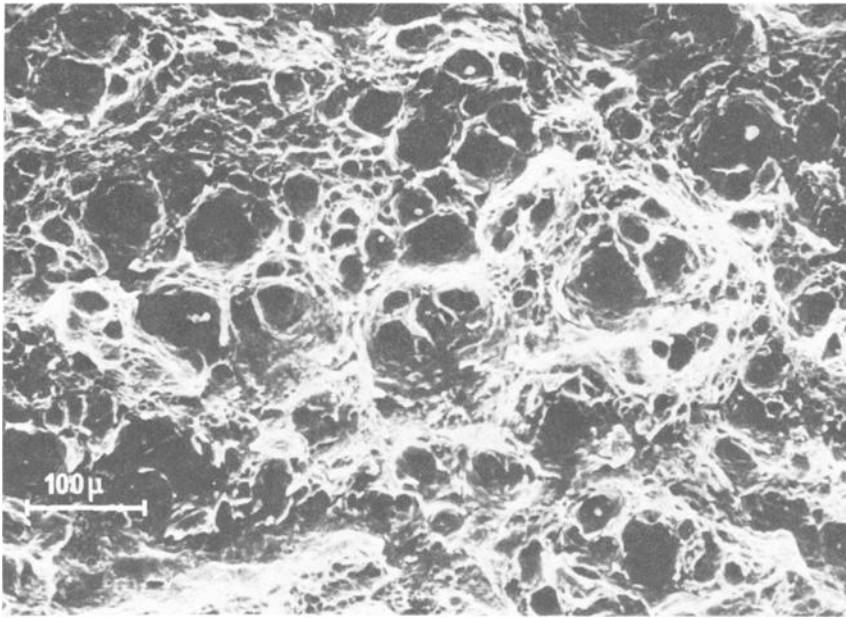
Typical fracture topography of the A508 Class 3 showing equiaxed dimples.
